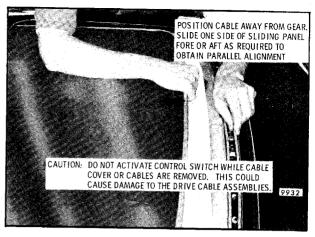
Repairing Improper Parallel Alignment - C Styles (E and K Typical)
